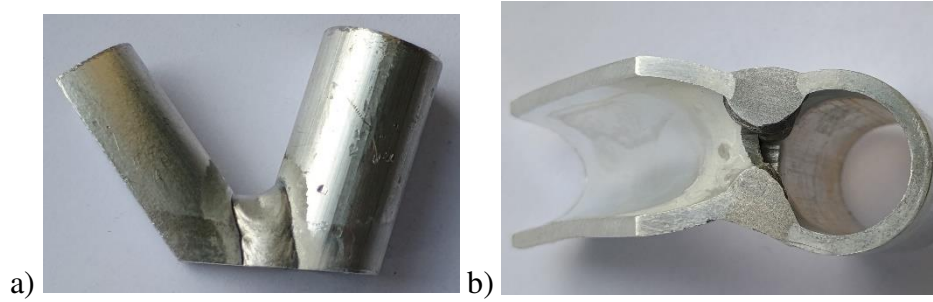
Pipe-to-pipe connection using the MIG method: a) weld face, b) joint cross-section.
